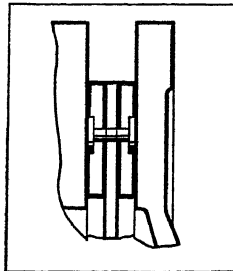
SINGLE PLATE CLUTCH, OR DISC-CLUTCH. MUCH USED IN MOTOR CARS
